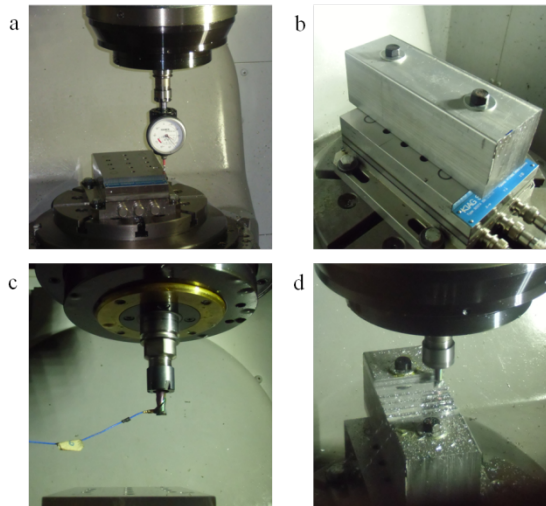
Tests set-up (a) dynamometer (b) workpiece (c) tool (d) slotting tests
